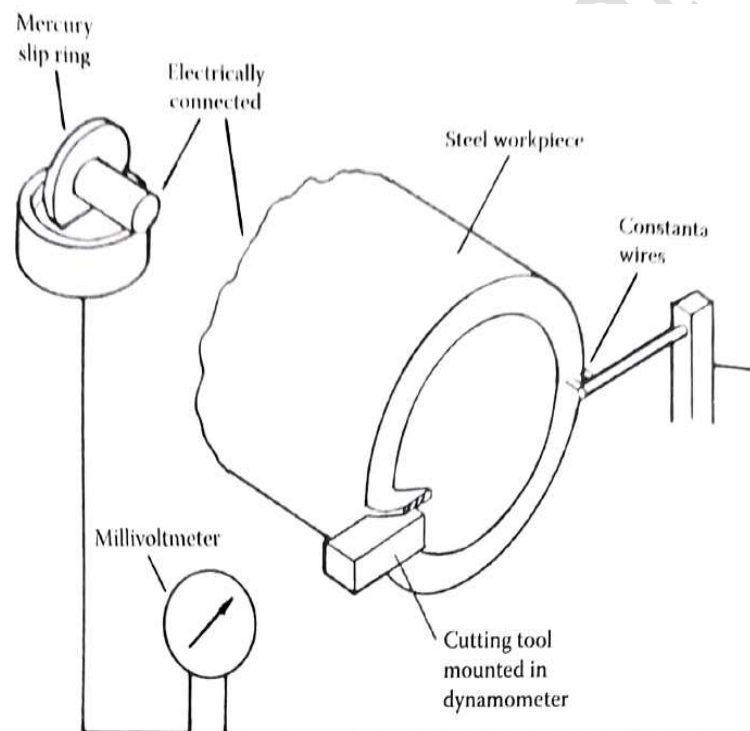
Arrangement for measurement of workpiece temperatures using the thermocouple technique.
